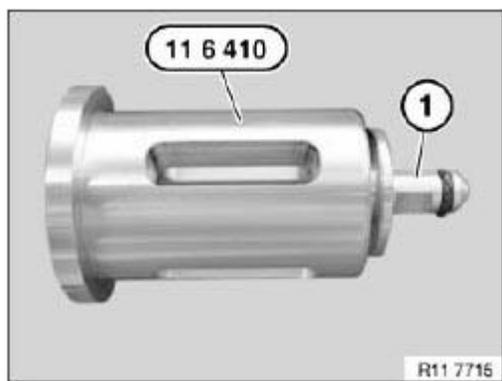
Identifying Screw Piece With Special Tool (11 6 410)
